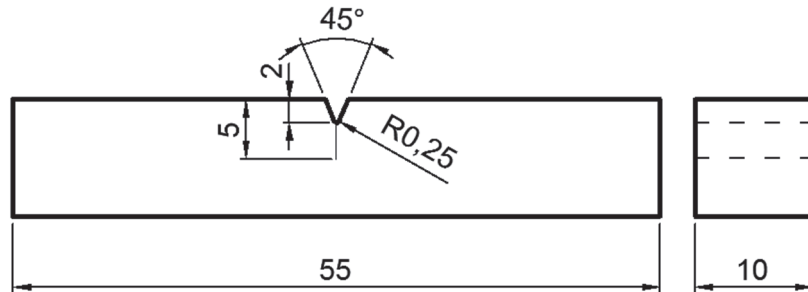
Dimensions of pre-cracked Standard Charpy V specimen [10,24]
